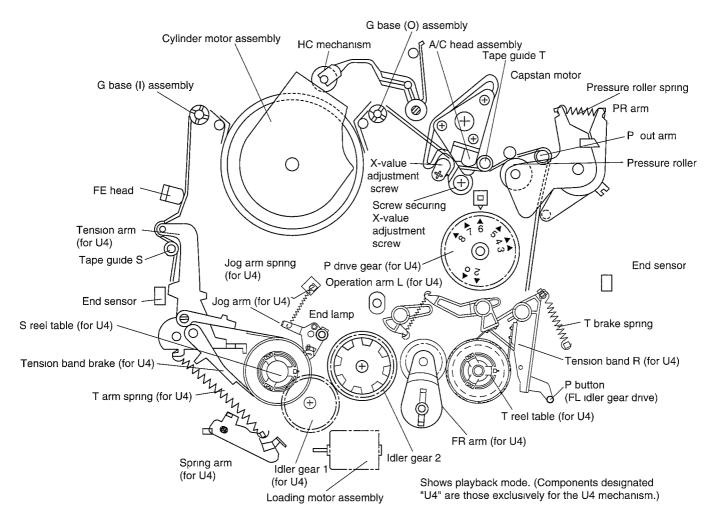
Locations of Major Components in U4 Mechanism (Top View)
